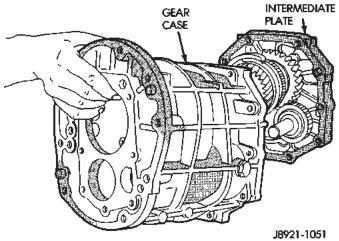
Install Transmission Gear Case to the Intermediate Plate
